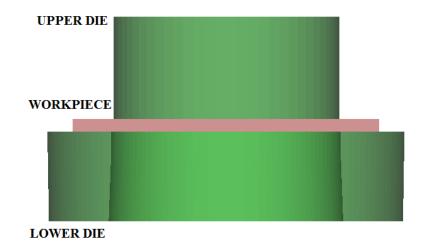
MSC.SuperForge Assembly for Blanking Operation
